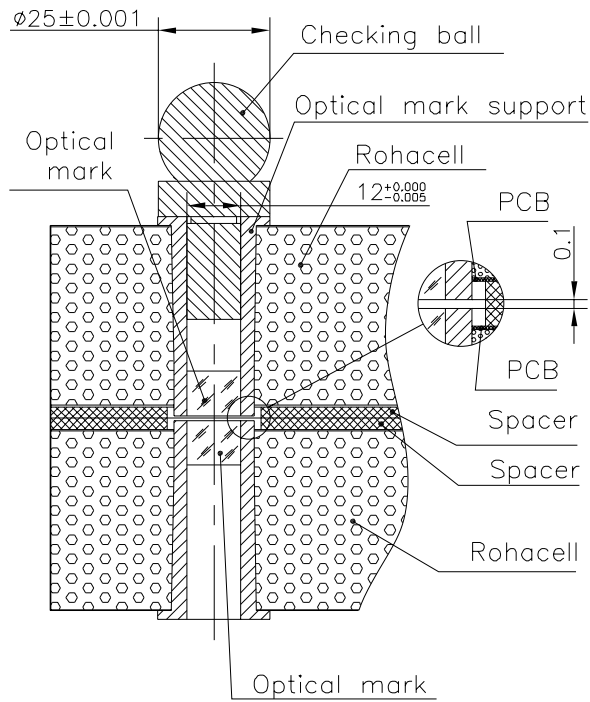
The cut view of the external reference mark without (upper part) and with (lower part) checking ball inserted.
